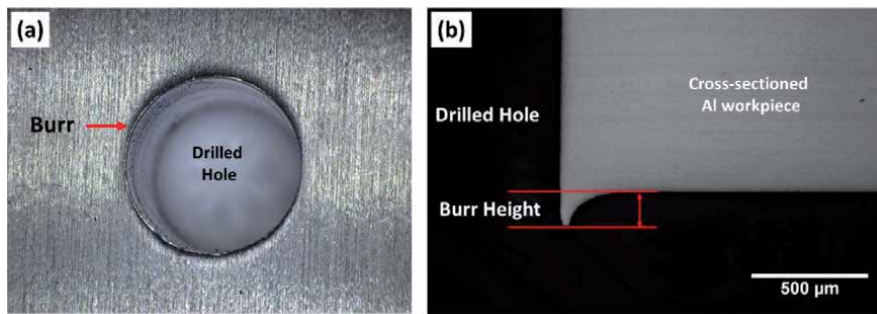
(a) Burr at the edge of the drilled hole (b) Burr height which is measured after the hole was sectioned into a half.
